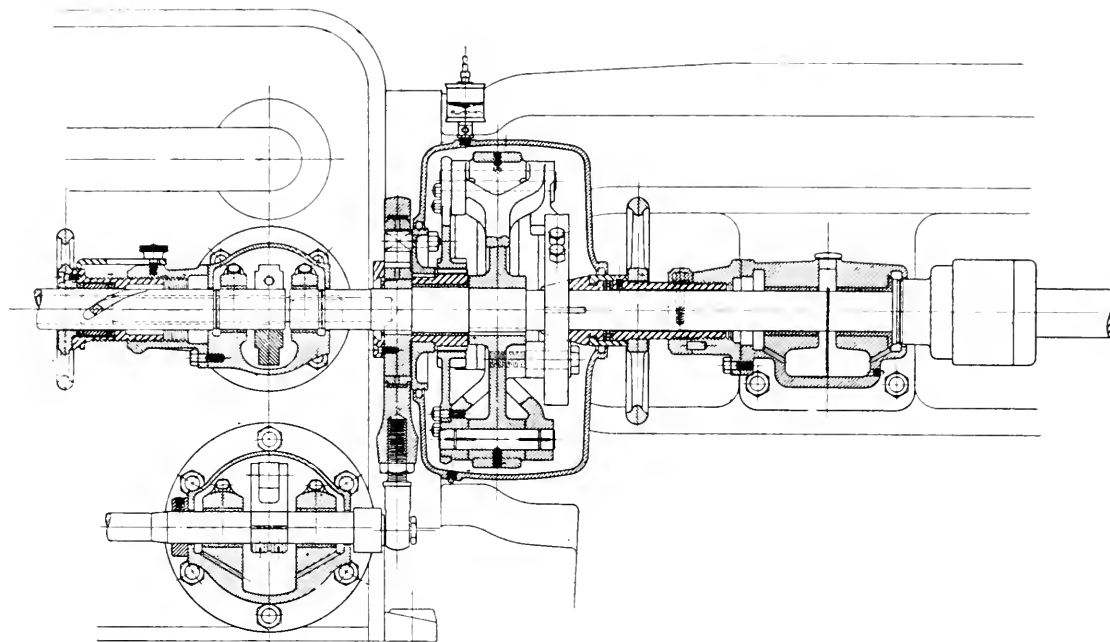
SECTION OF VALVE CAMS, GOVERNOR AND HAND SPEED ADJUSTMENT
